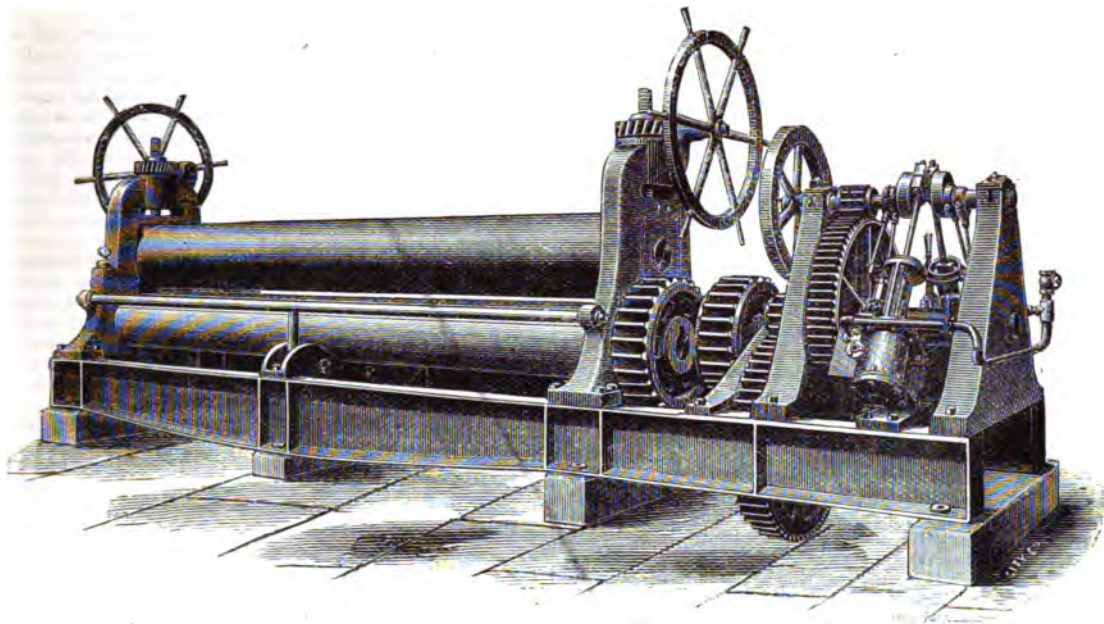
BERRY & SON'S HORIZONTAL PLATE BENDING MACHINE. (For Description see page 229.)
